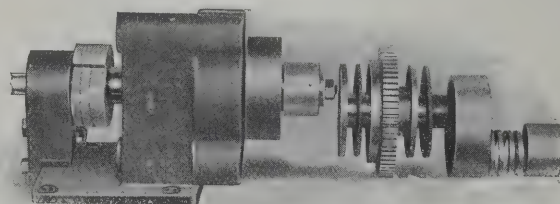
Friction Stop Mechanism for Indexing; shown Assembled and Dismantled
